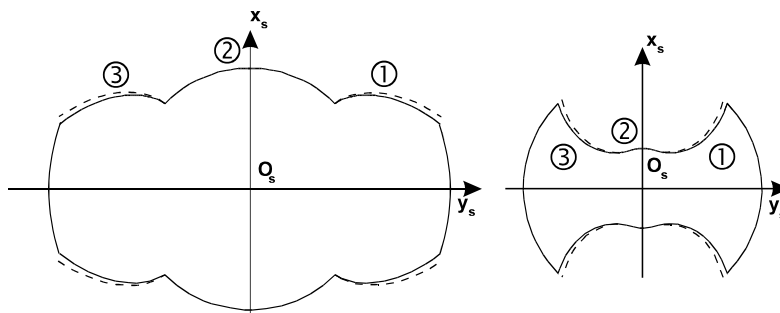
Comparison of the profiles on a cross section: (a) central screw rotor, (b) idler screw rotor.
